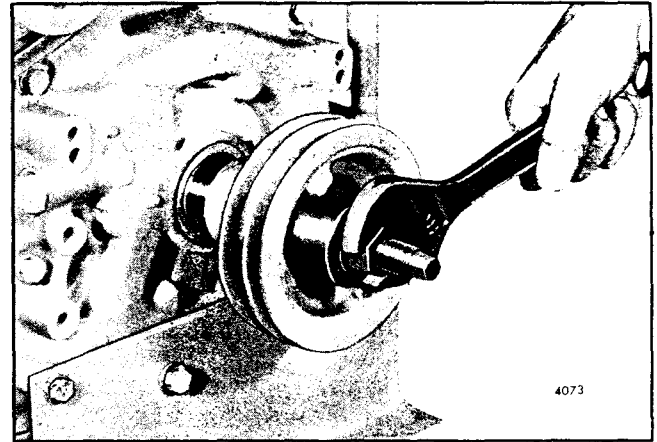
Installing Crankshaft Pulley Using Installer J 7773
